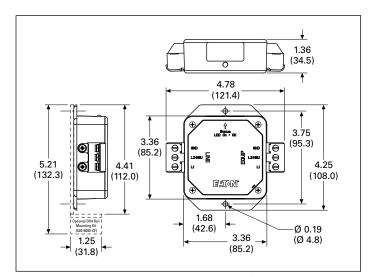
AGCFxxx10 Dimensions in Inches (mm)
